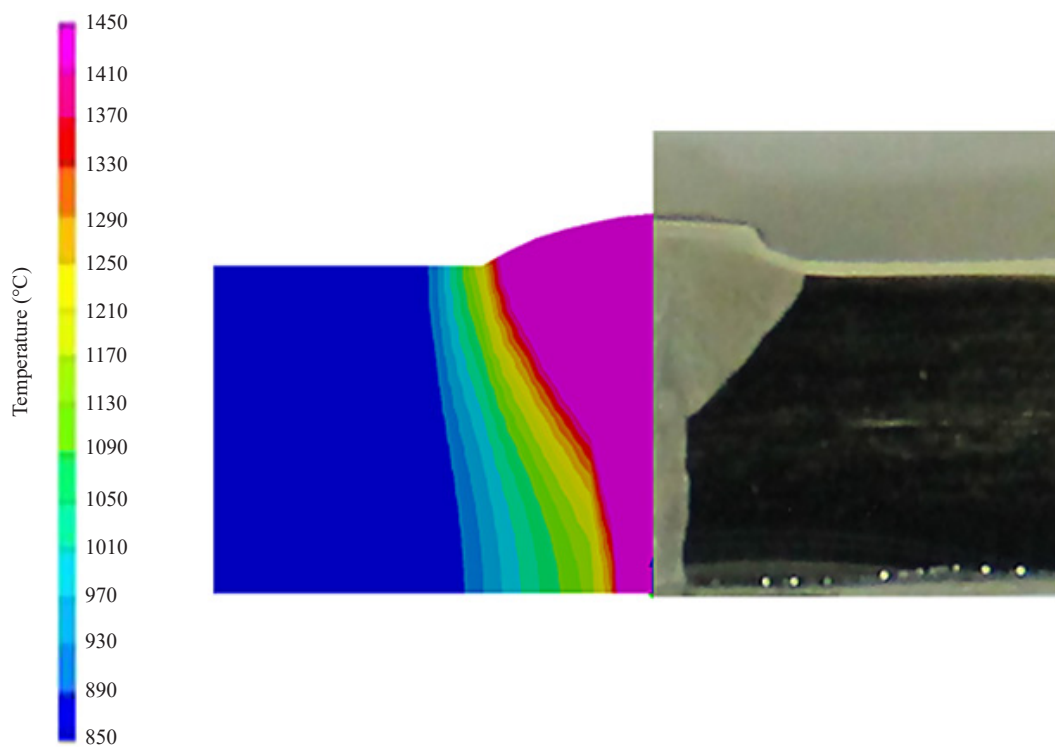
Validated hybrid laser-MIG weld macrograph
